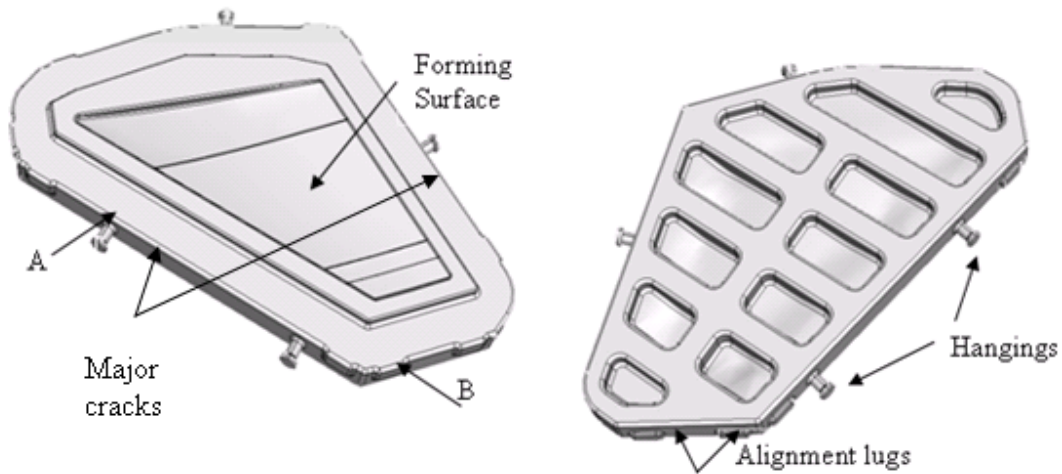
Geometry of realistic superplastic forming tool: (a) top view SPF tool (b) bottom view of SPF tool.
